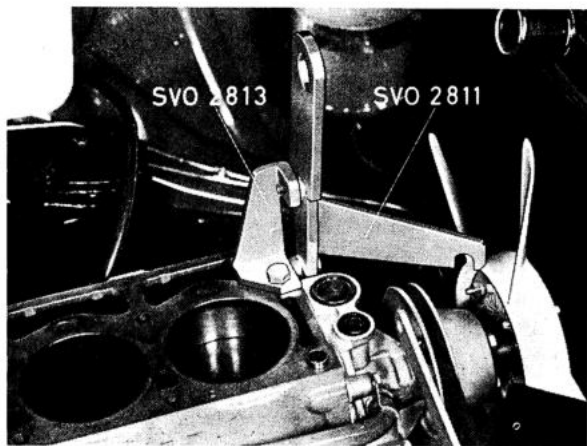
Fitting support SVO 2813 with cylinder head removed
